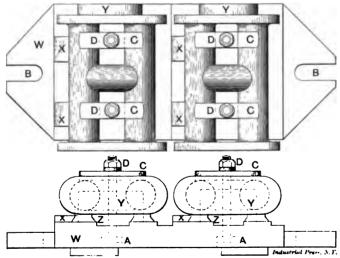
Fixture Used in Milling the Ends of Casting shown in Fig. 18. into the rim, so that a roughing and a finishing cut can be taken at the same time. When one end of the castings has been faced they are reversed, relocated, and the other end is then faced.
